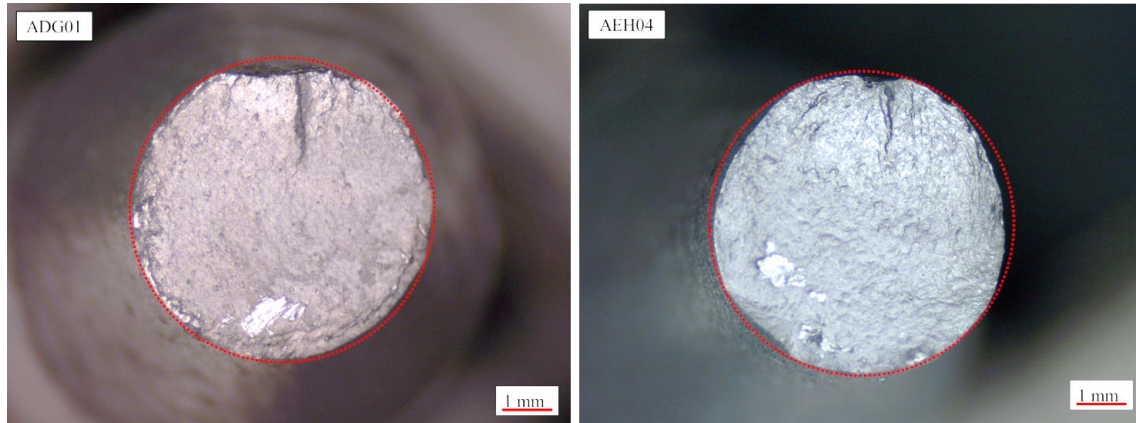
Stereoscopic images of fracture surfaces in horizontally built samples for shot-peened (ADG01) and shot-peened and fine blasted (AEH04) surface finishing.
